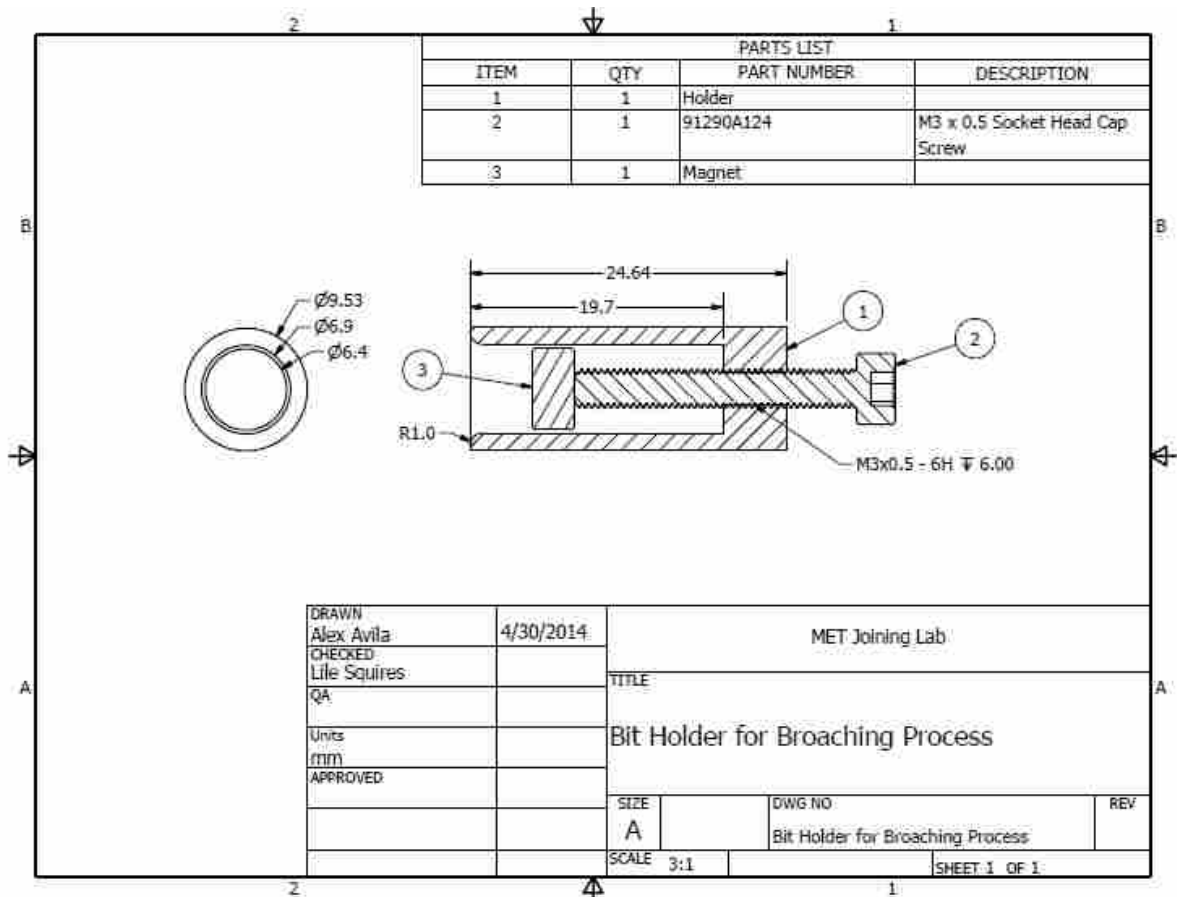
Drawing of the Fixture Developed to Hold Bit Blanks for Torx Broaching
